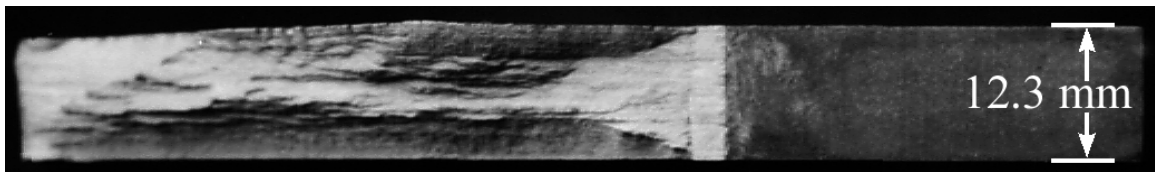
Fracture surface of 6Al-4V Ti specimen loaded quasistatically.
